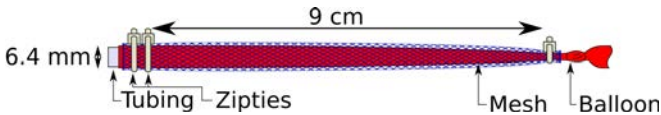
Drawing of McKibben actuator with dimensions labeled.
